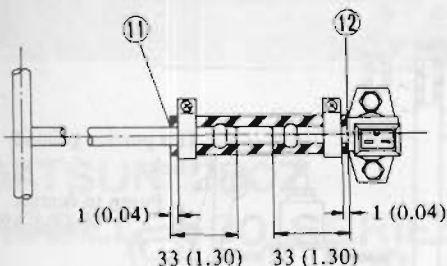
Fuel feed pipe to fuel filter inlet pipe rubber hose
